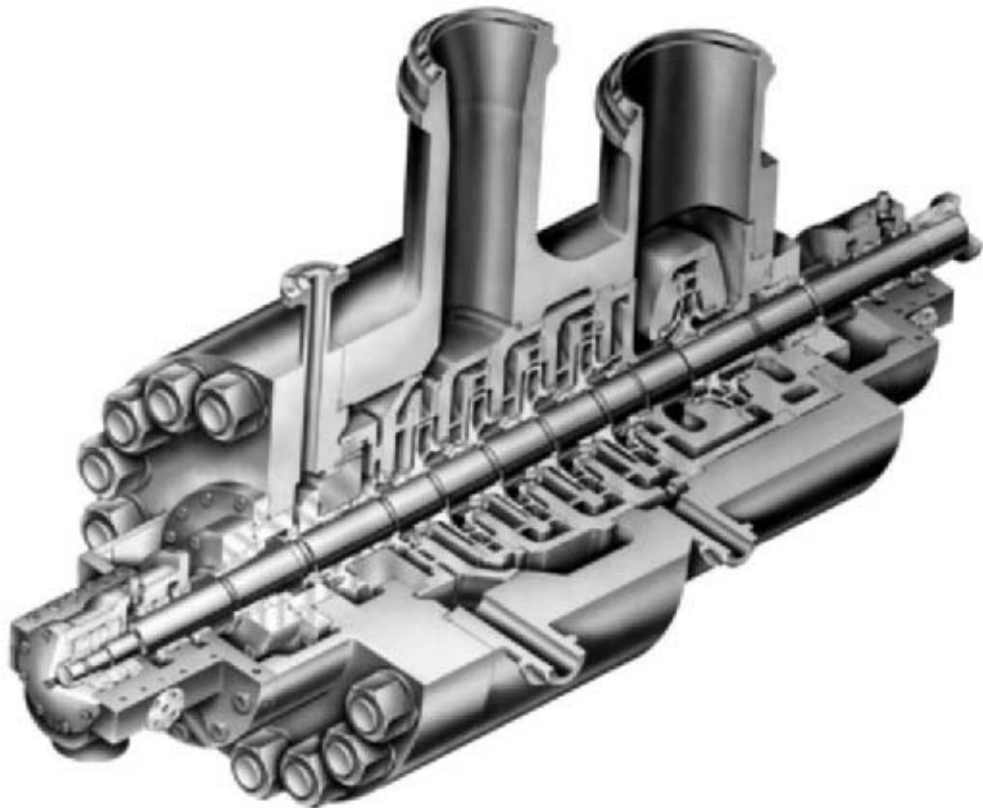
Double-casing multistage barrel-type pump with radially split inner casing (Flowsolve Corporation)
